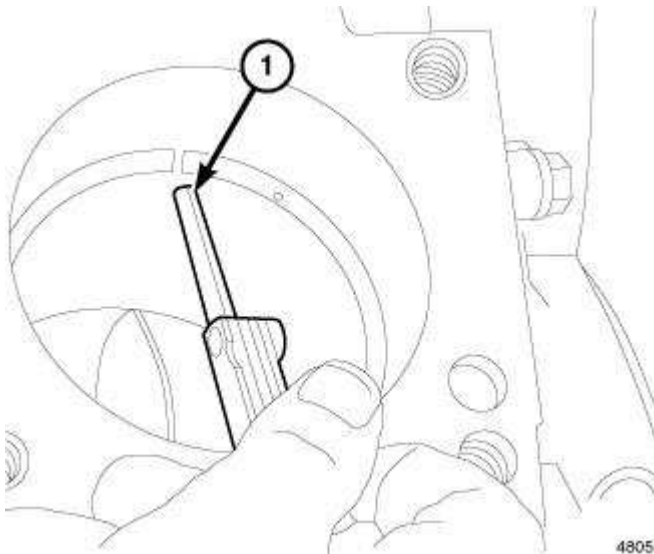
Using Feeler Gauge To Check Ring End Gap
